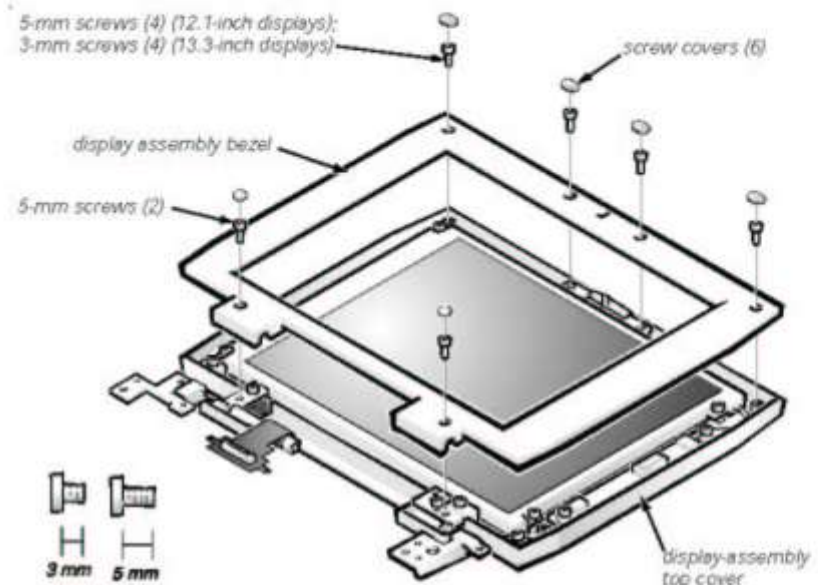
Display Assembly Bezel Removal (12.1-Inch Display Shown)
